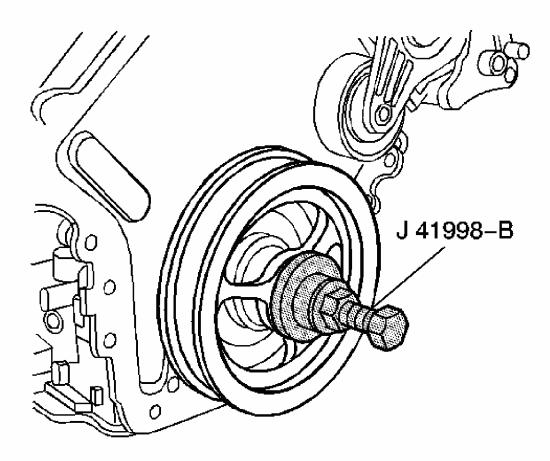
Identifying J 41998-A Installing Crankshaft Balancer Courtesy of GENERAL MOTORS CORP.
